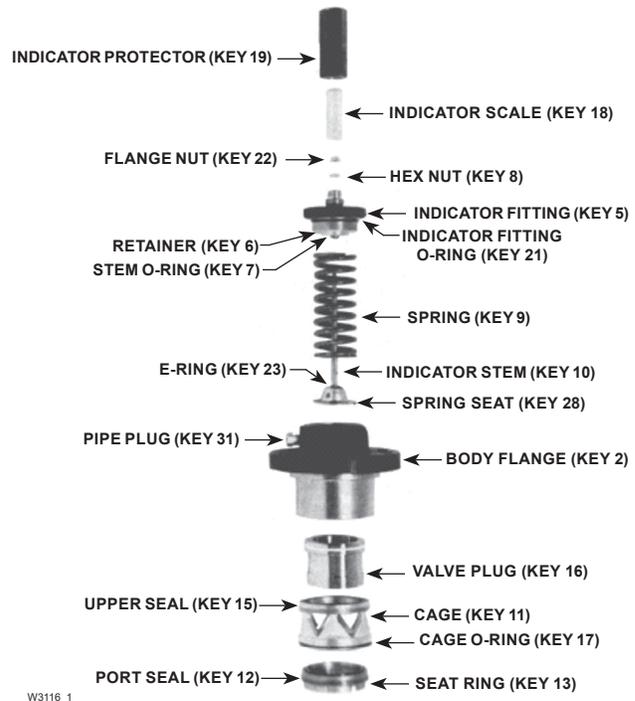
Exploded View of Full-Capacity Trim Package Assembly
